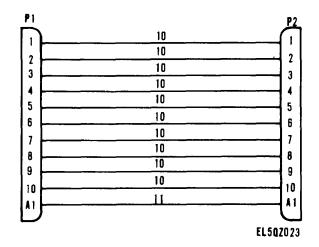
Cable Assembly, Special Purpose, Electrical 217-803028-000 (4W5), Wiring Diagram.
